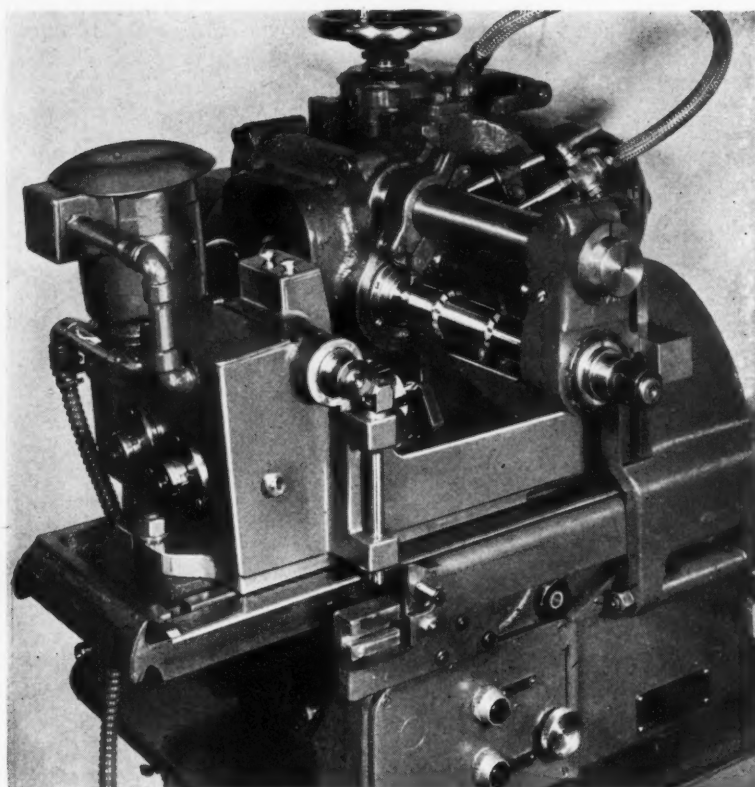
Milling Four Grooves in a Special Type Screwdriver, Using Electrically Operated Automatic Indexing
